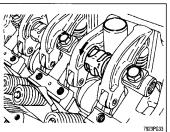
Installing the rocker shaft springs— 2.4L (4G64) engines
